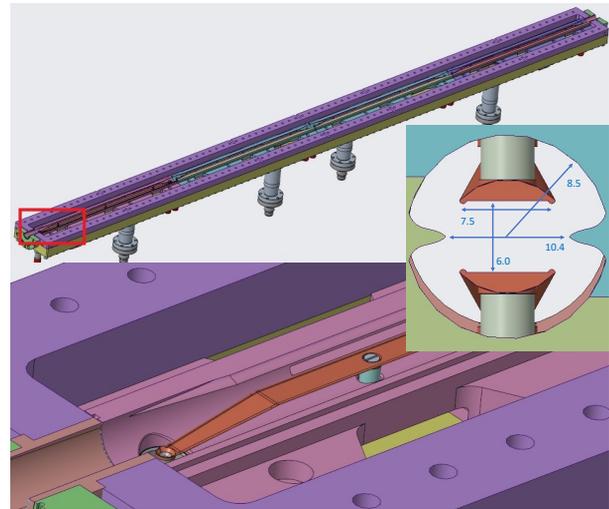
Swap-out kicker 4-module assembly (top), stripline dielectric support and taper (bottom), and transverse section with dimensions in mm (insert).
